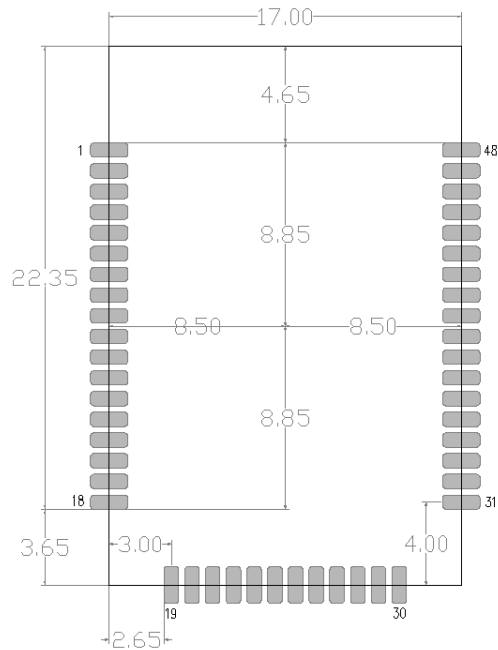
Outer Dimensions of the LOM102A (top view)
